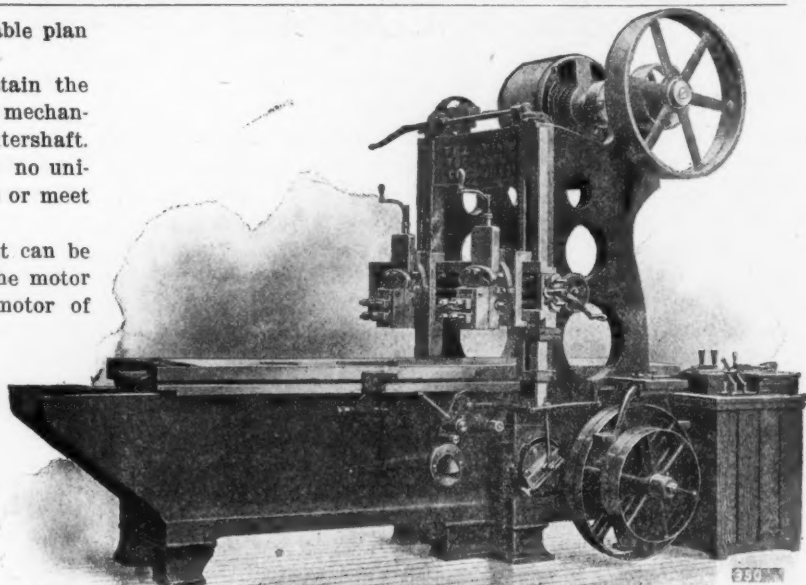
DIRECT CONNECTED MOTOR DRIVE UPON A PLANER BUILT BY THE AMERICAN TOOL WORKS COMPANY, SHOWING USE OF FLYWHEEL. BULLOCK CONSTANT-SPEED MOTOR.
